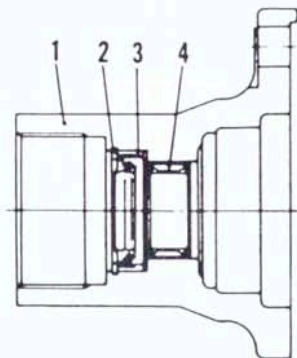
Upper cover bearing and seal installation. Open side of oil seal (3) should face bearing (4).
